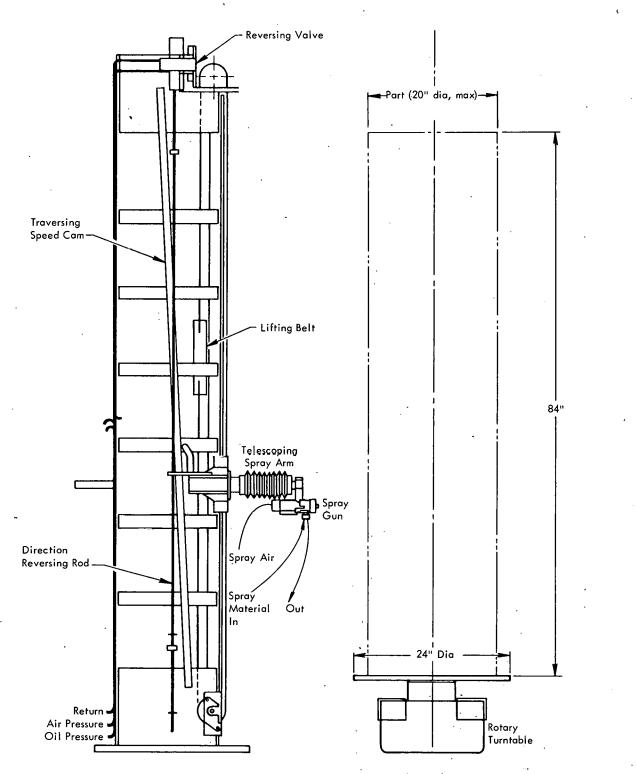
SIDE VIEW OF THE AUTOMATIC SPRAY MACHINE.
